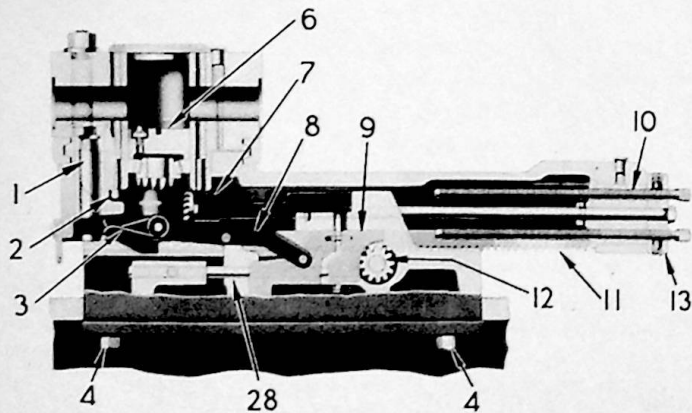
Phantom View of Turret Slide and Saddle for No. 2 Turret Lathes.
